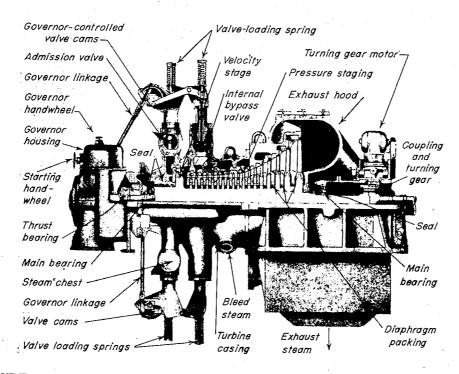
Sectional view of typical impulse turbine. Wheels carry buckets or blades; diaphragms carry nozzles separating stages.
